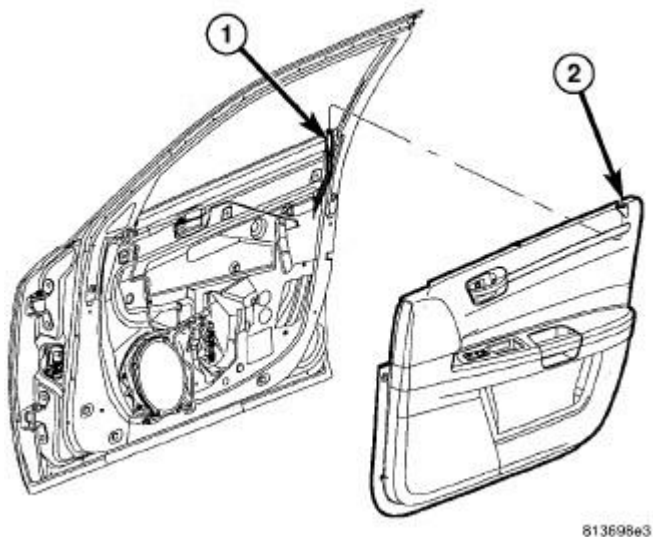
Identifying Location Of Staples On Belt Line Molding
